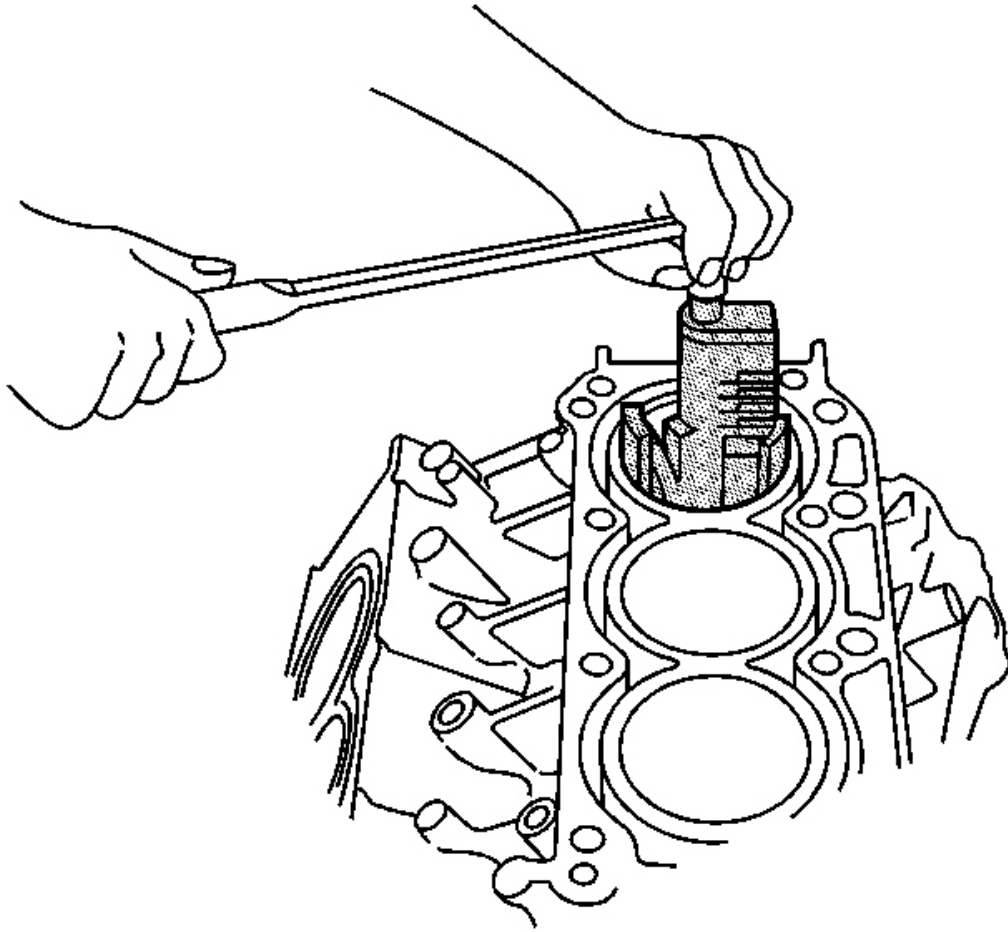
View Of SA9187NE To Remove The Cylinder Ridge
